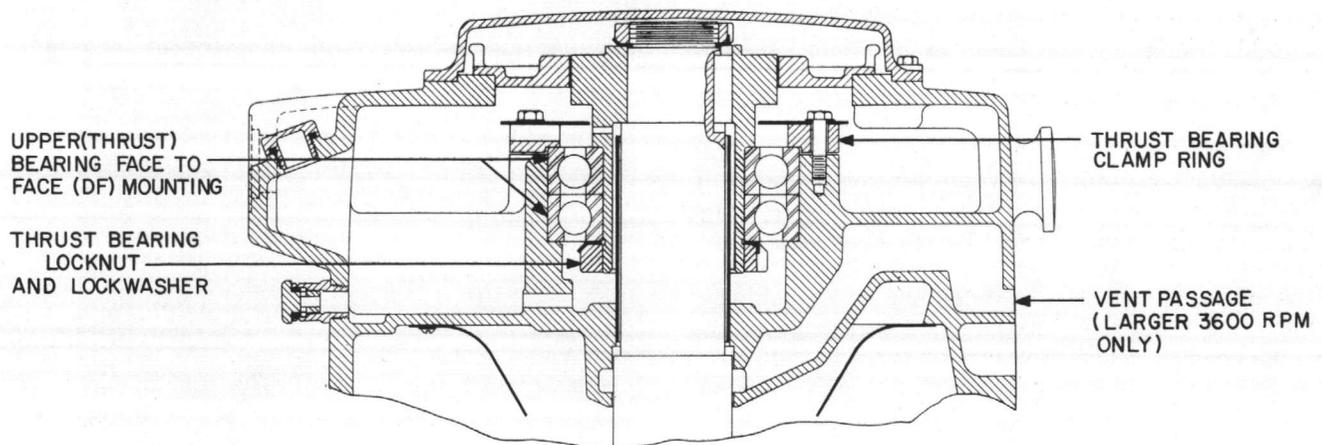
Upper end of a typical solid-shaft motor which must withstand continuous up-thrust with DF-mounted bearings
